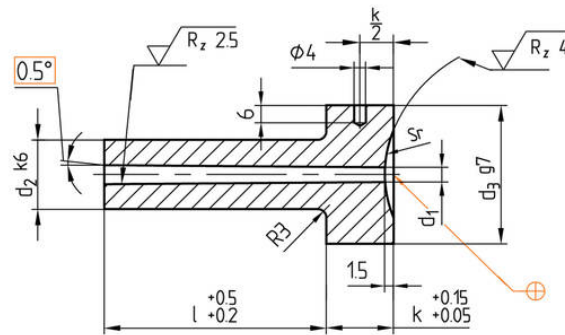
Sprue bushing design [HASCO Hasenclever GmbH + Co KG, 2010, Sprue Bushing Z512]
